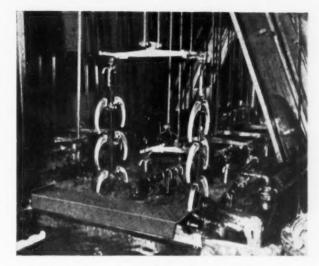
Parts being nickel plated in one section of an automatic plating machine.
